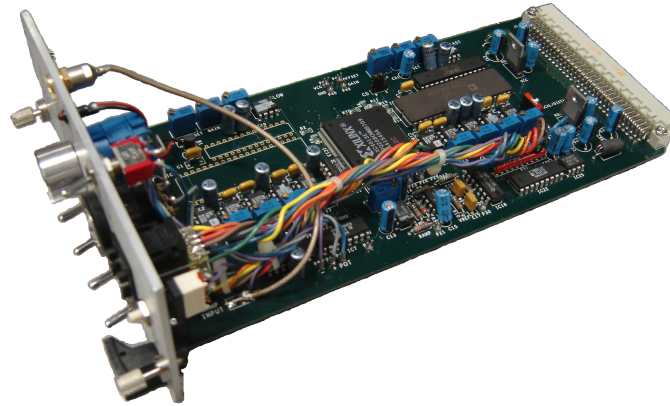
(color) A printed circuit board (PCB) layout of the feedback electronics built by Saclay used for cavity locking.
